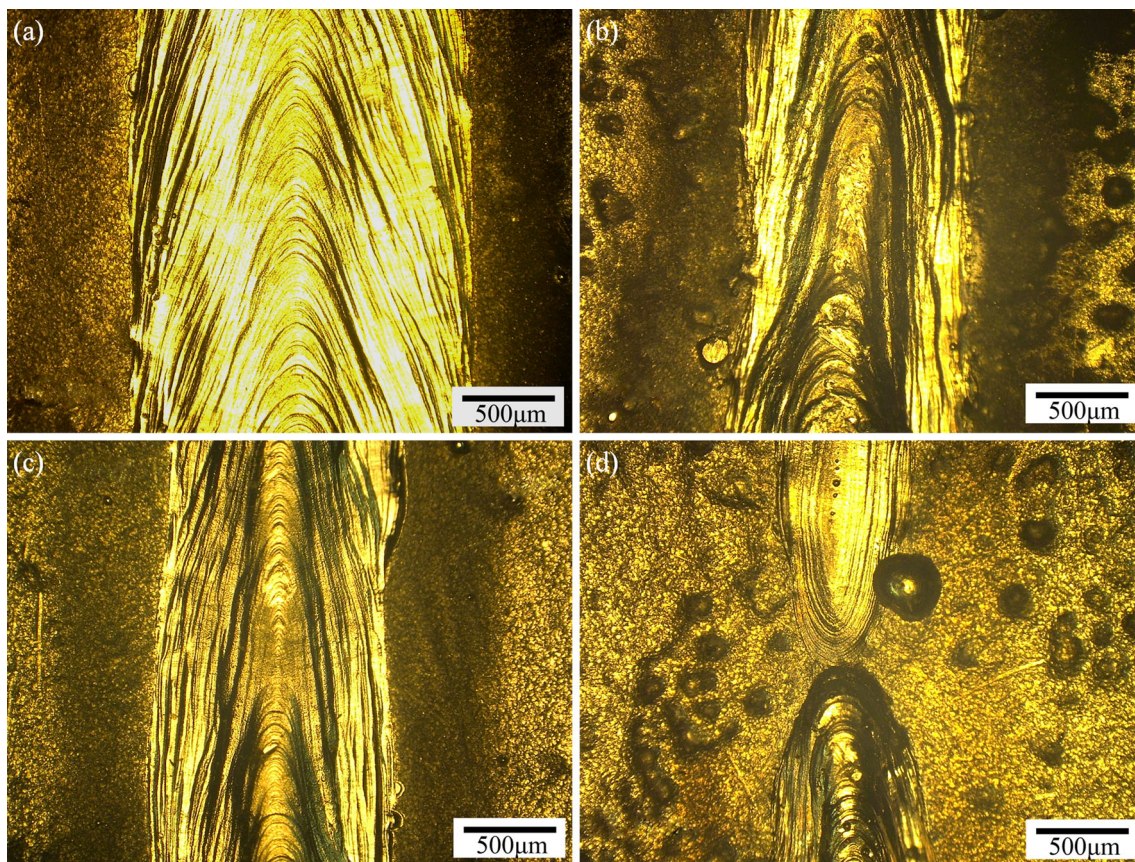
Underside appearance of root welds at different welding speeds: a 20 mm/s (1.2 m/min); b 25 mm/s (1.5 m/min); c 30 mm/s (1.8 m/min); and d 35 mm/s (2.1 m/min)
